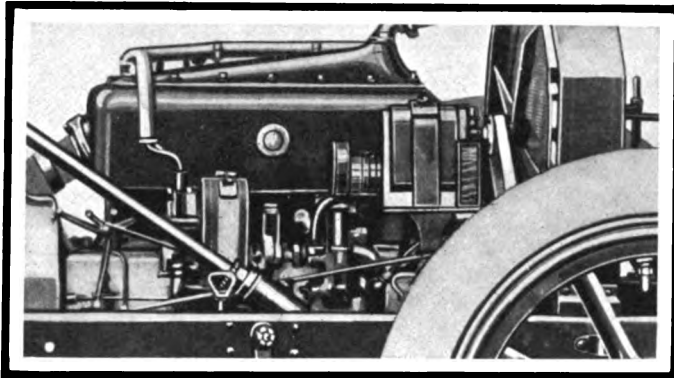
Valve side of the 34-40 Abbott-Detroit
